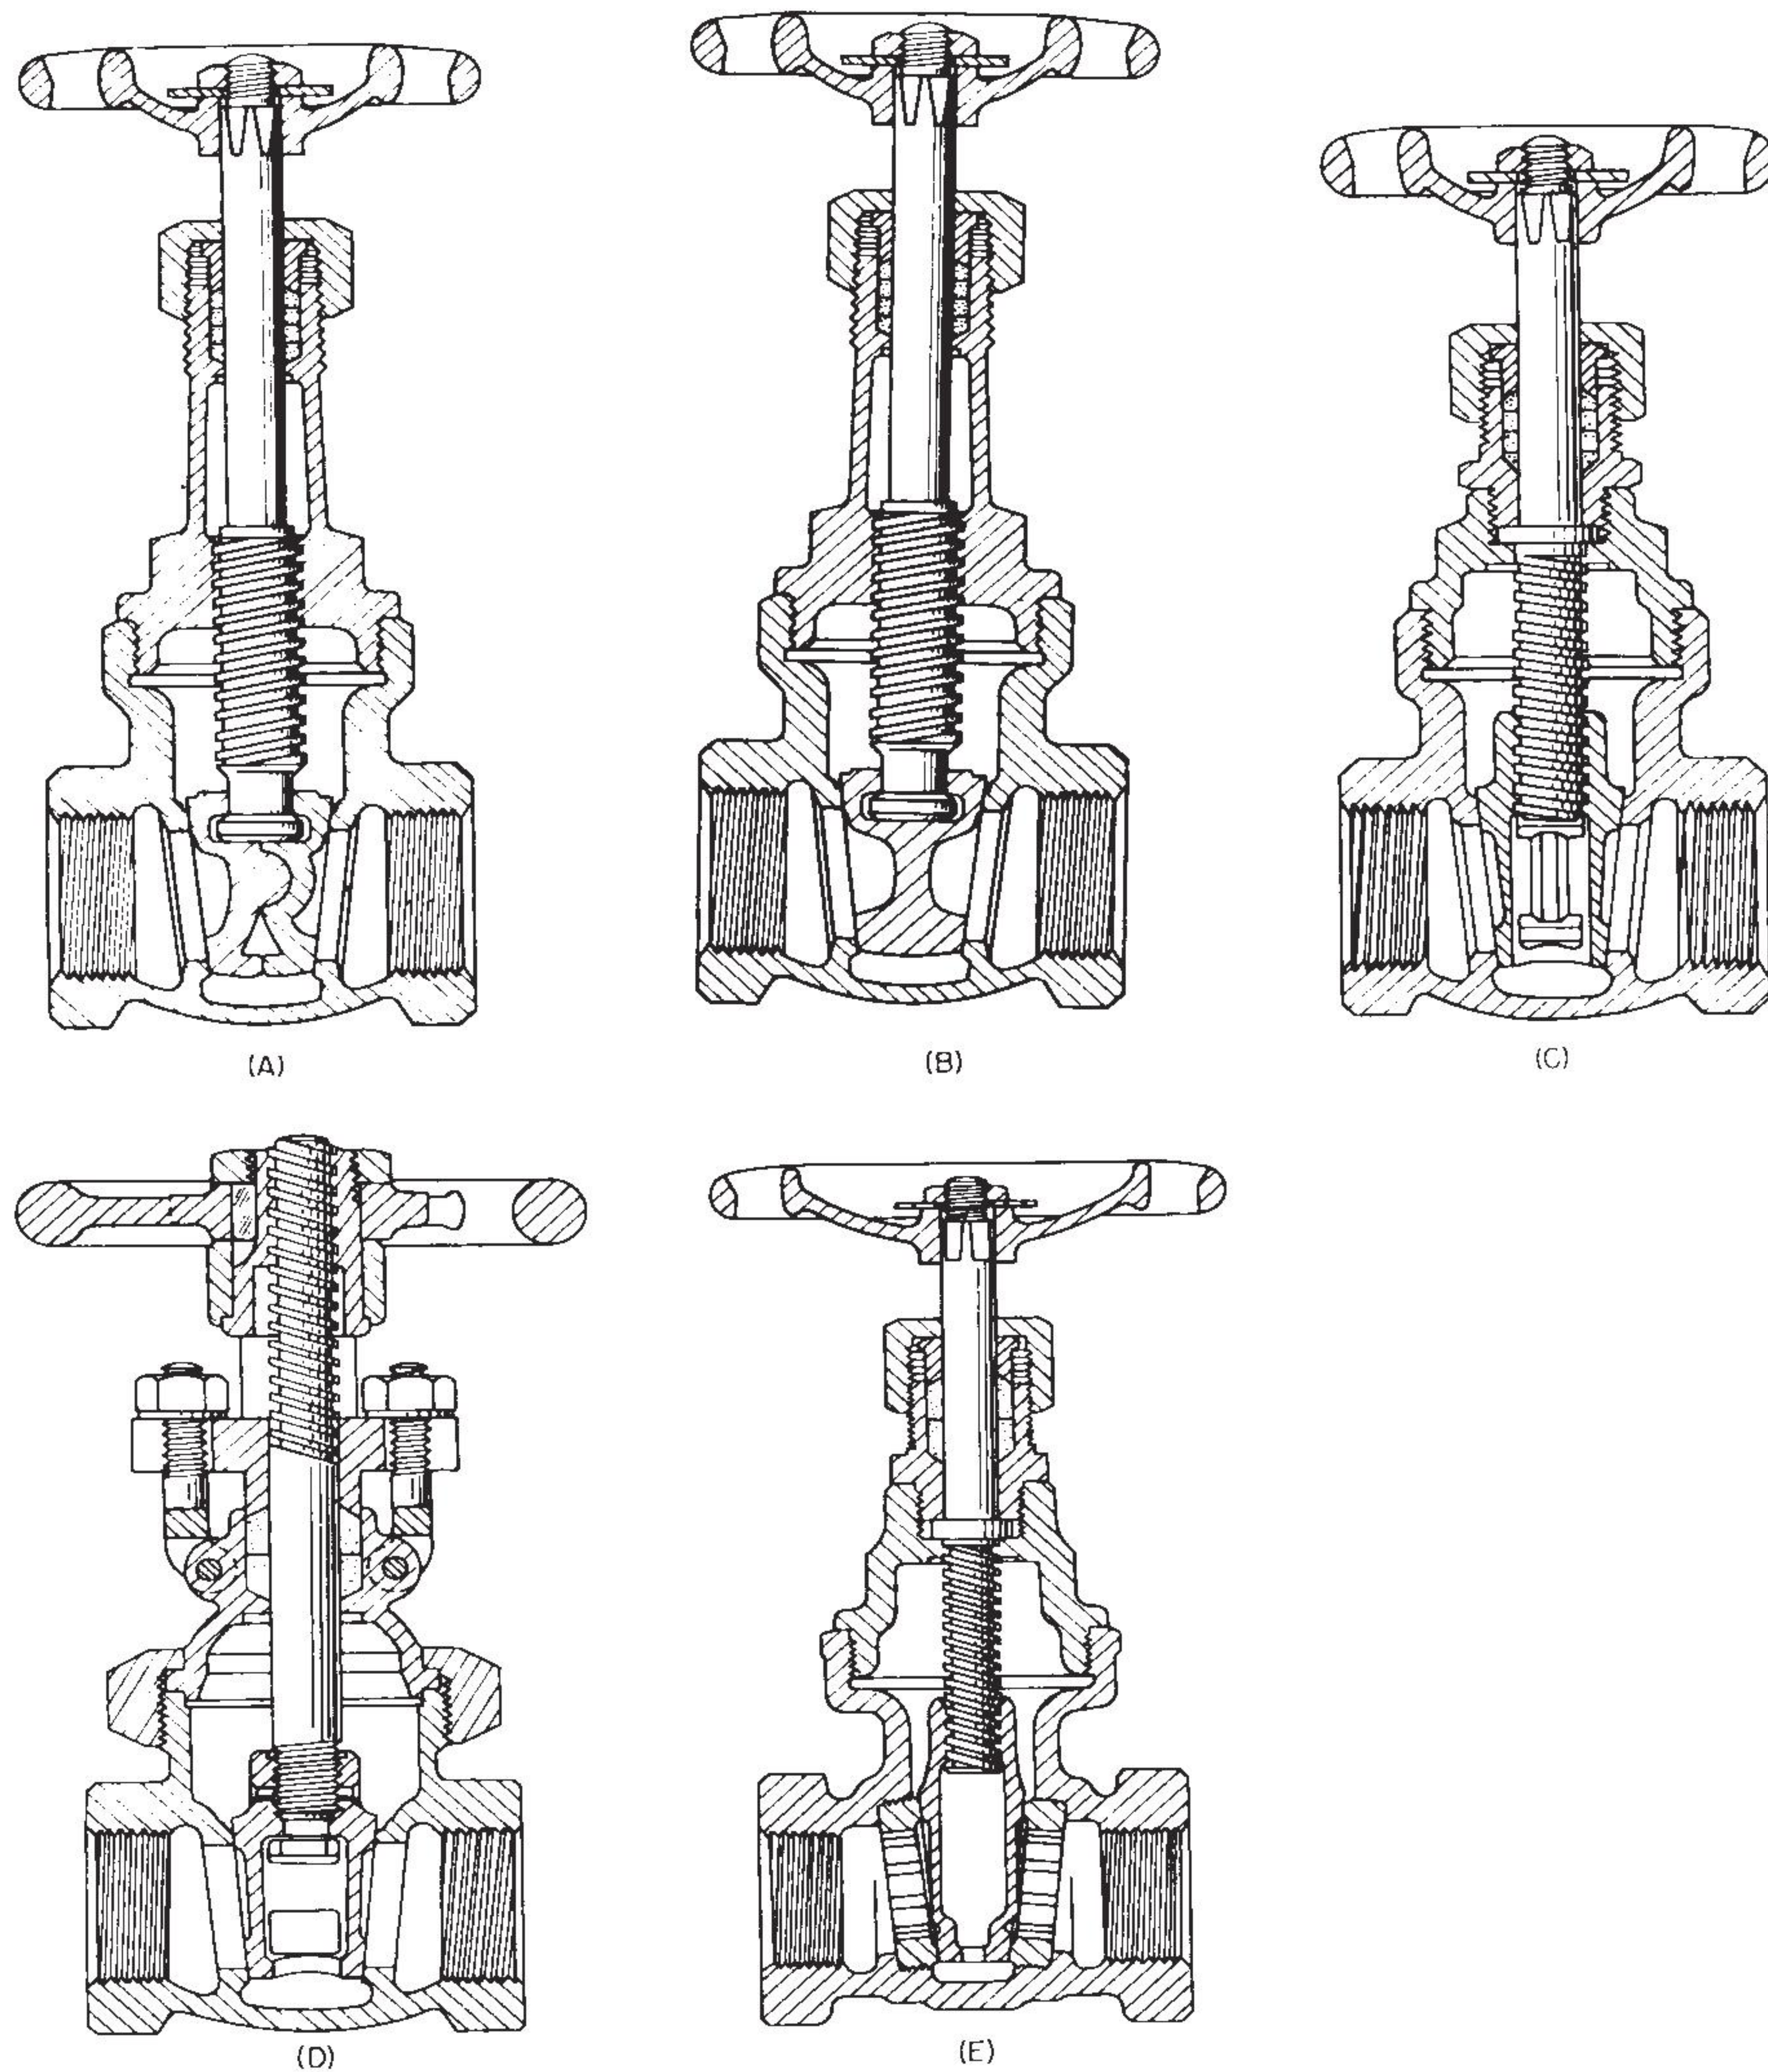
Bronze gate valves. *A.* Rising-stem, double-wedge disk. *B.* Solid-wedge disk, rising stem. *C.* Non-rising-stem, single-wedge disk. *D.* Outside screw and yoke union bonnet, single-wedge disk. *E.* Nonrising stem, single-wedge disk, renewable seat rings.
